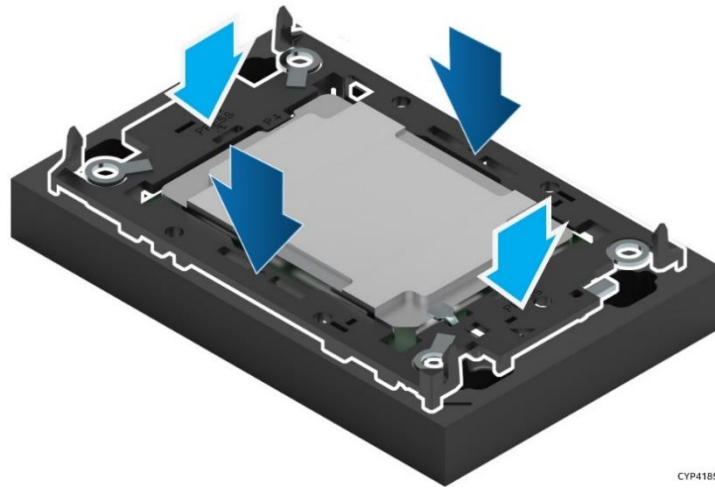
Installing Processor Carrier Clip onto Processor – Part 2
